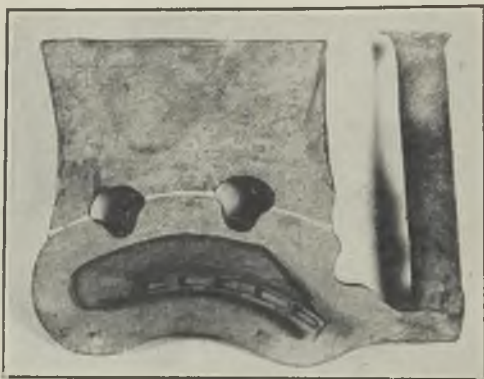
NOZZLE SEGMENT CASTING WITH
